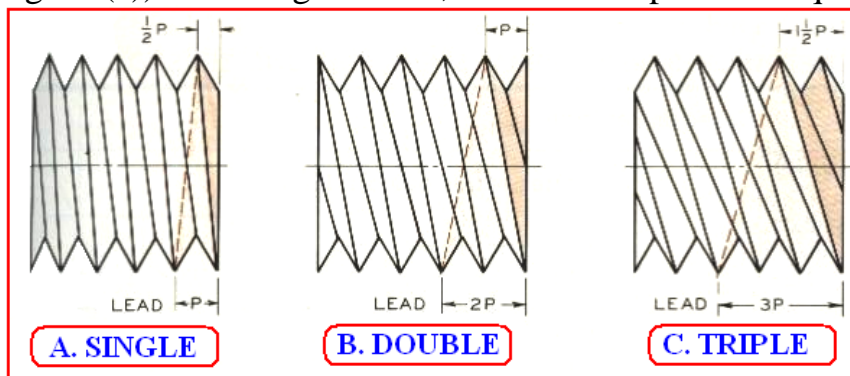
(a) Single thread, & (b,c) Multiple thread
